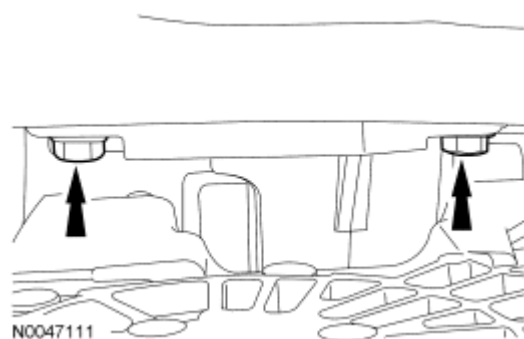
Locating Bolts On Rear Transaxle Insulator
